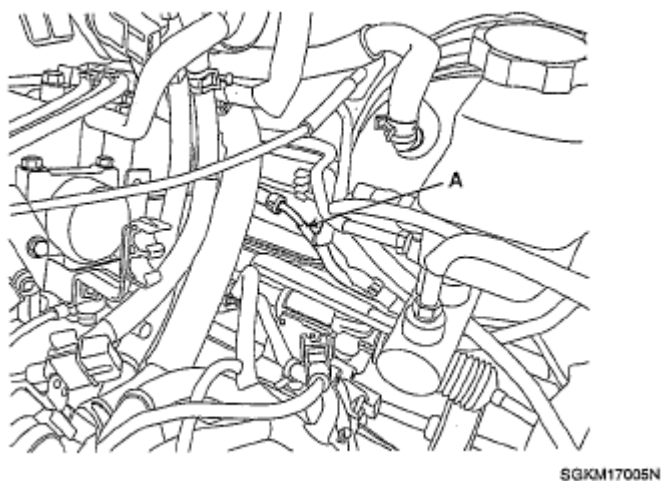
Identifying Purge Control Solenoid Valve Hose
